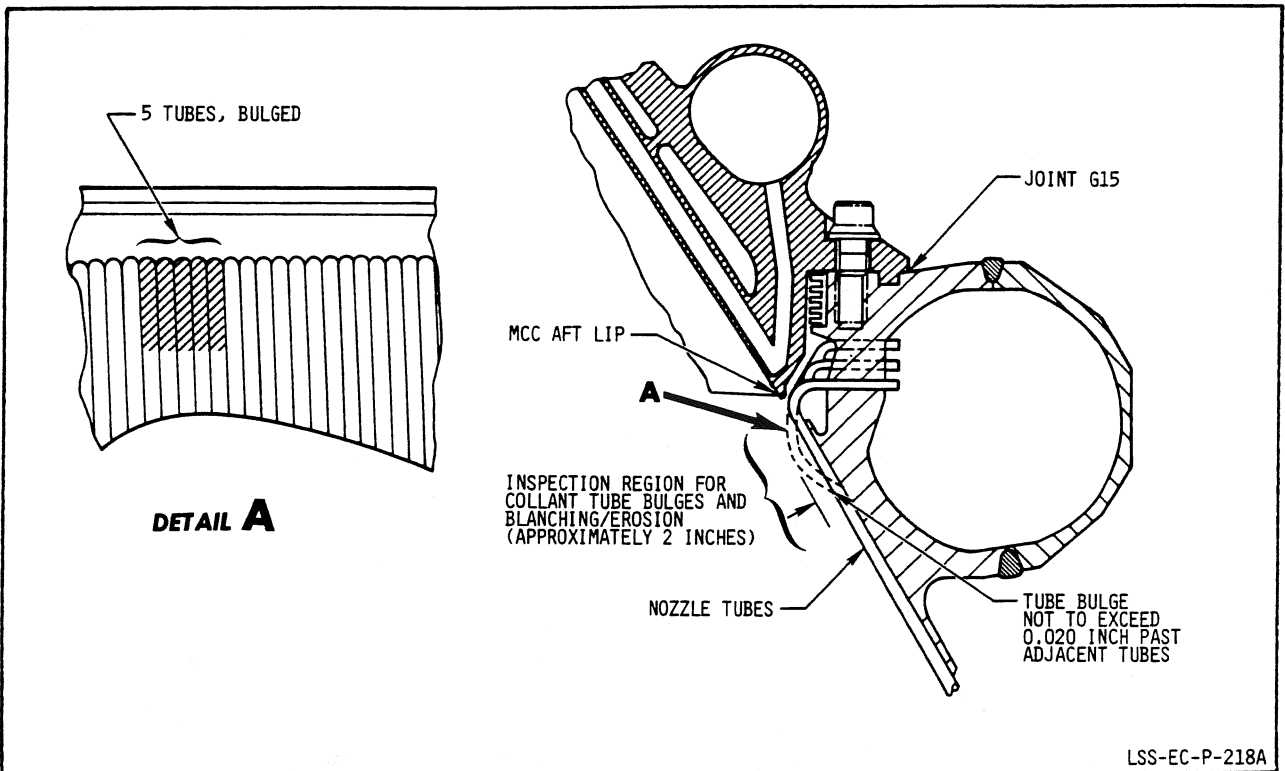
Nozzle Coolant Tube Bulge Inspection
